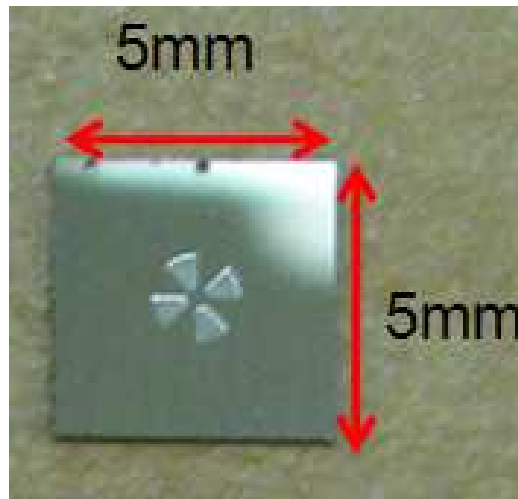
Fabricated and Diced Rotor Ready for Testing.
